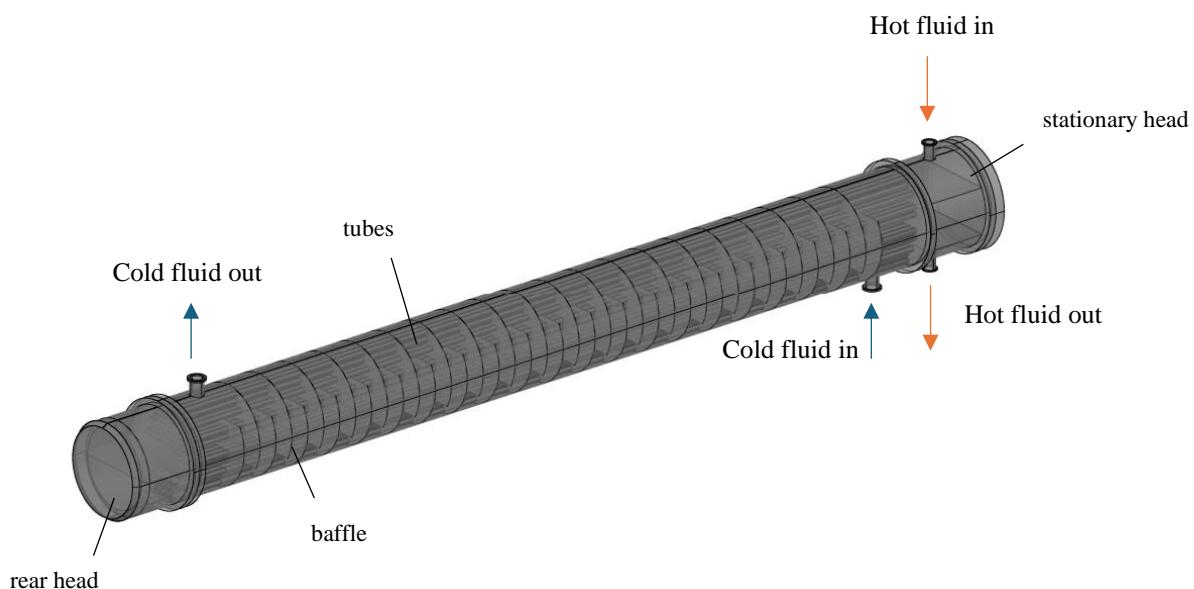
Engineering Drawing of 1-4 type of shell-and-tube heat exchanger (X-ray view) by AutoCAD software
